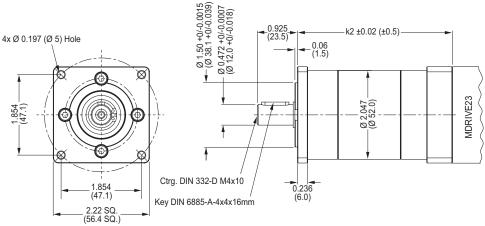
Planetary Gearbox Specifications for MDrive23Plus
